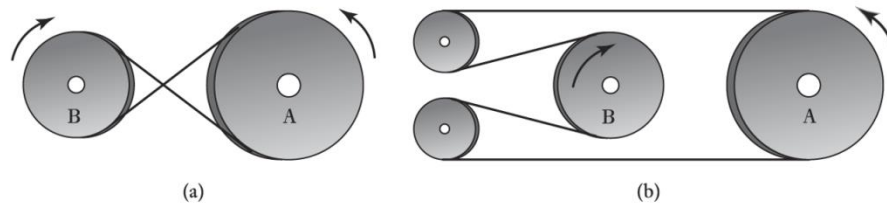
Reversed belt drives: (a) crossed belt, (b) open belt
